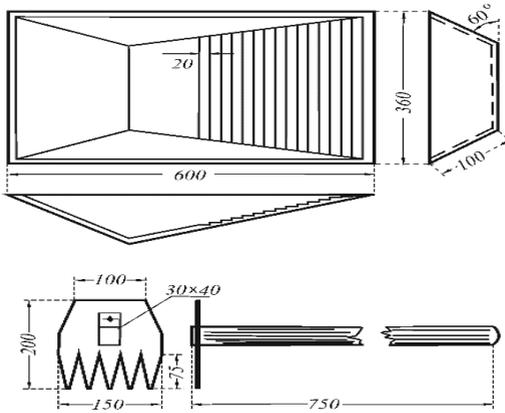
Prospector tray with grooves on the flush plane and a paddle for removing coarse-fragmented material, and crushing clay pellets during screening.
